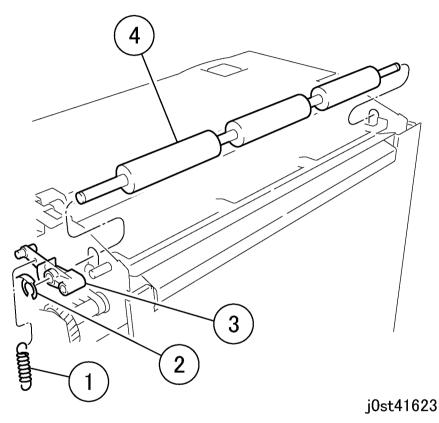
Removing the Decurler Roll Assembly (j0st41623)
